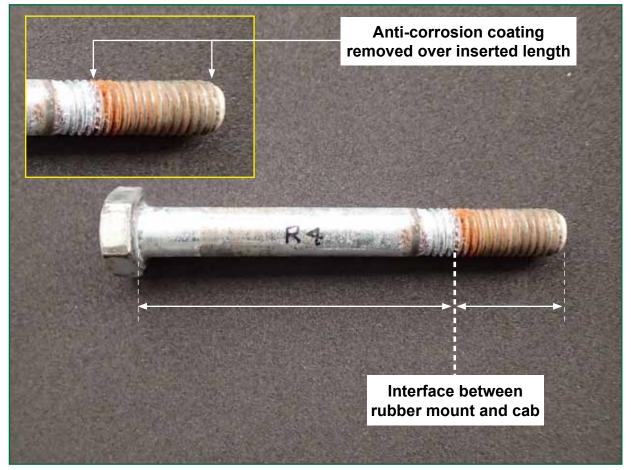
Bolt R4 removed for inspection with evidence of corrosion forming at the interface between the rubber mount and cab roof surface. Inset: anti-corrosion coating removed by the action of inserting the bolt into the blind hole.
